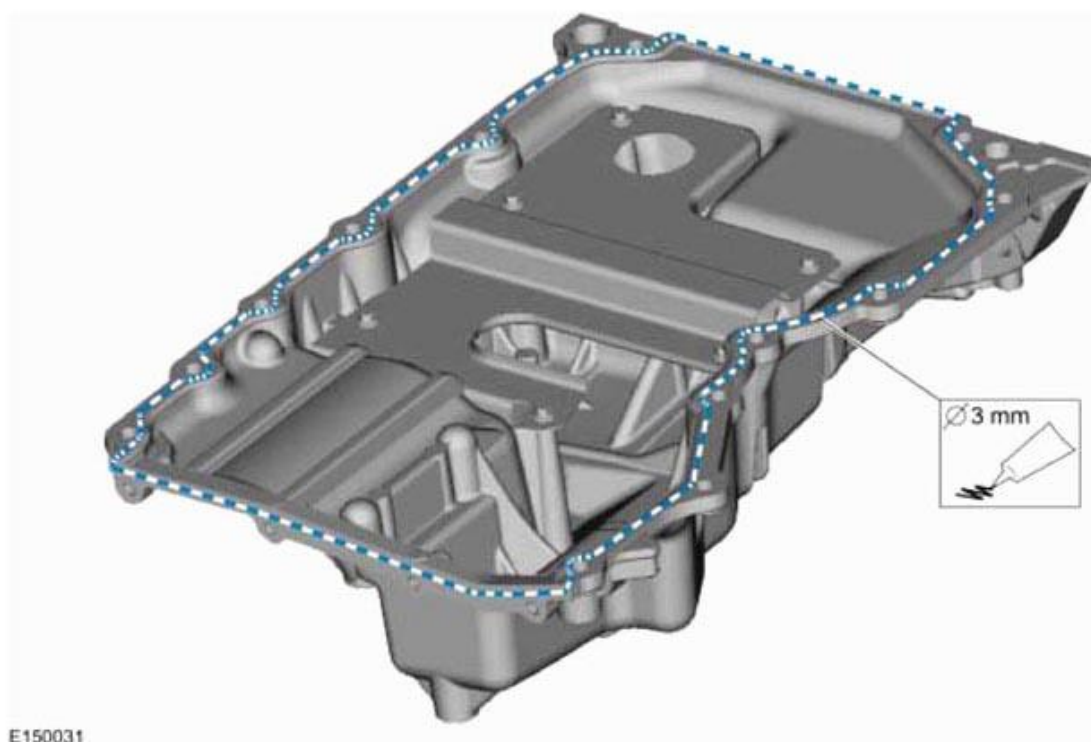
Applying Sealant To Oil Pan-To-Engine Block
